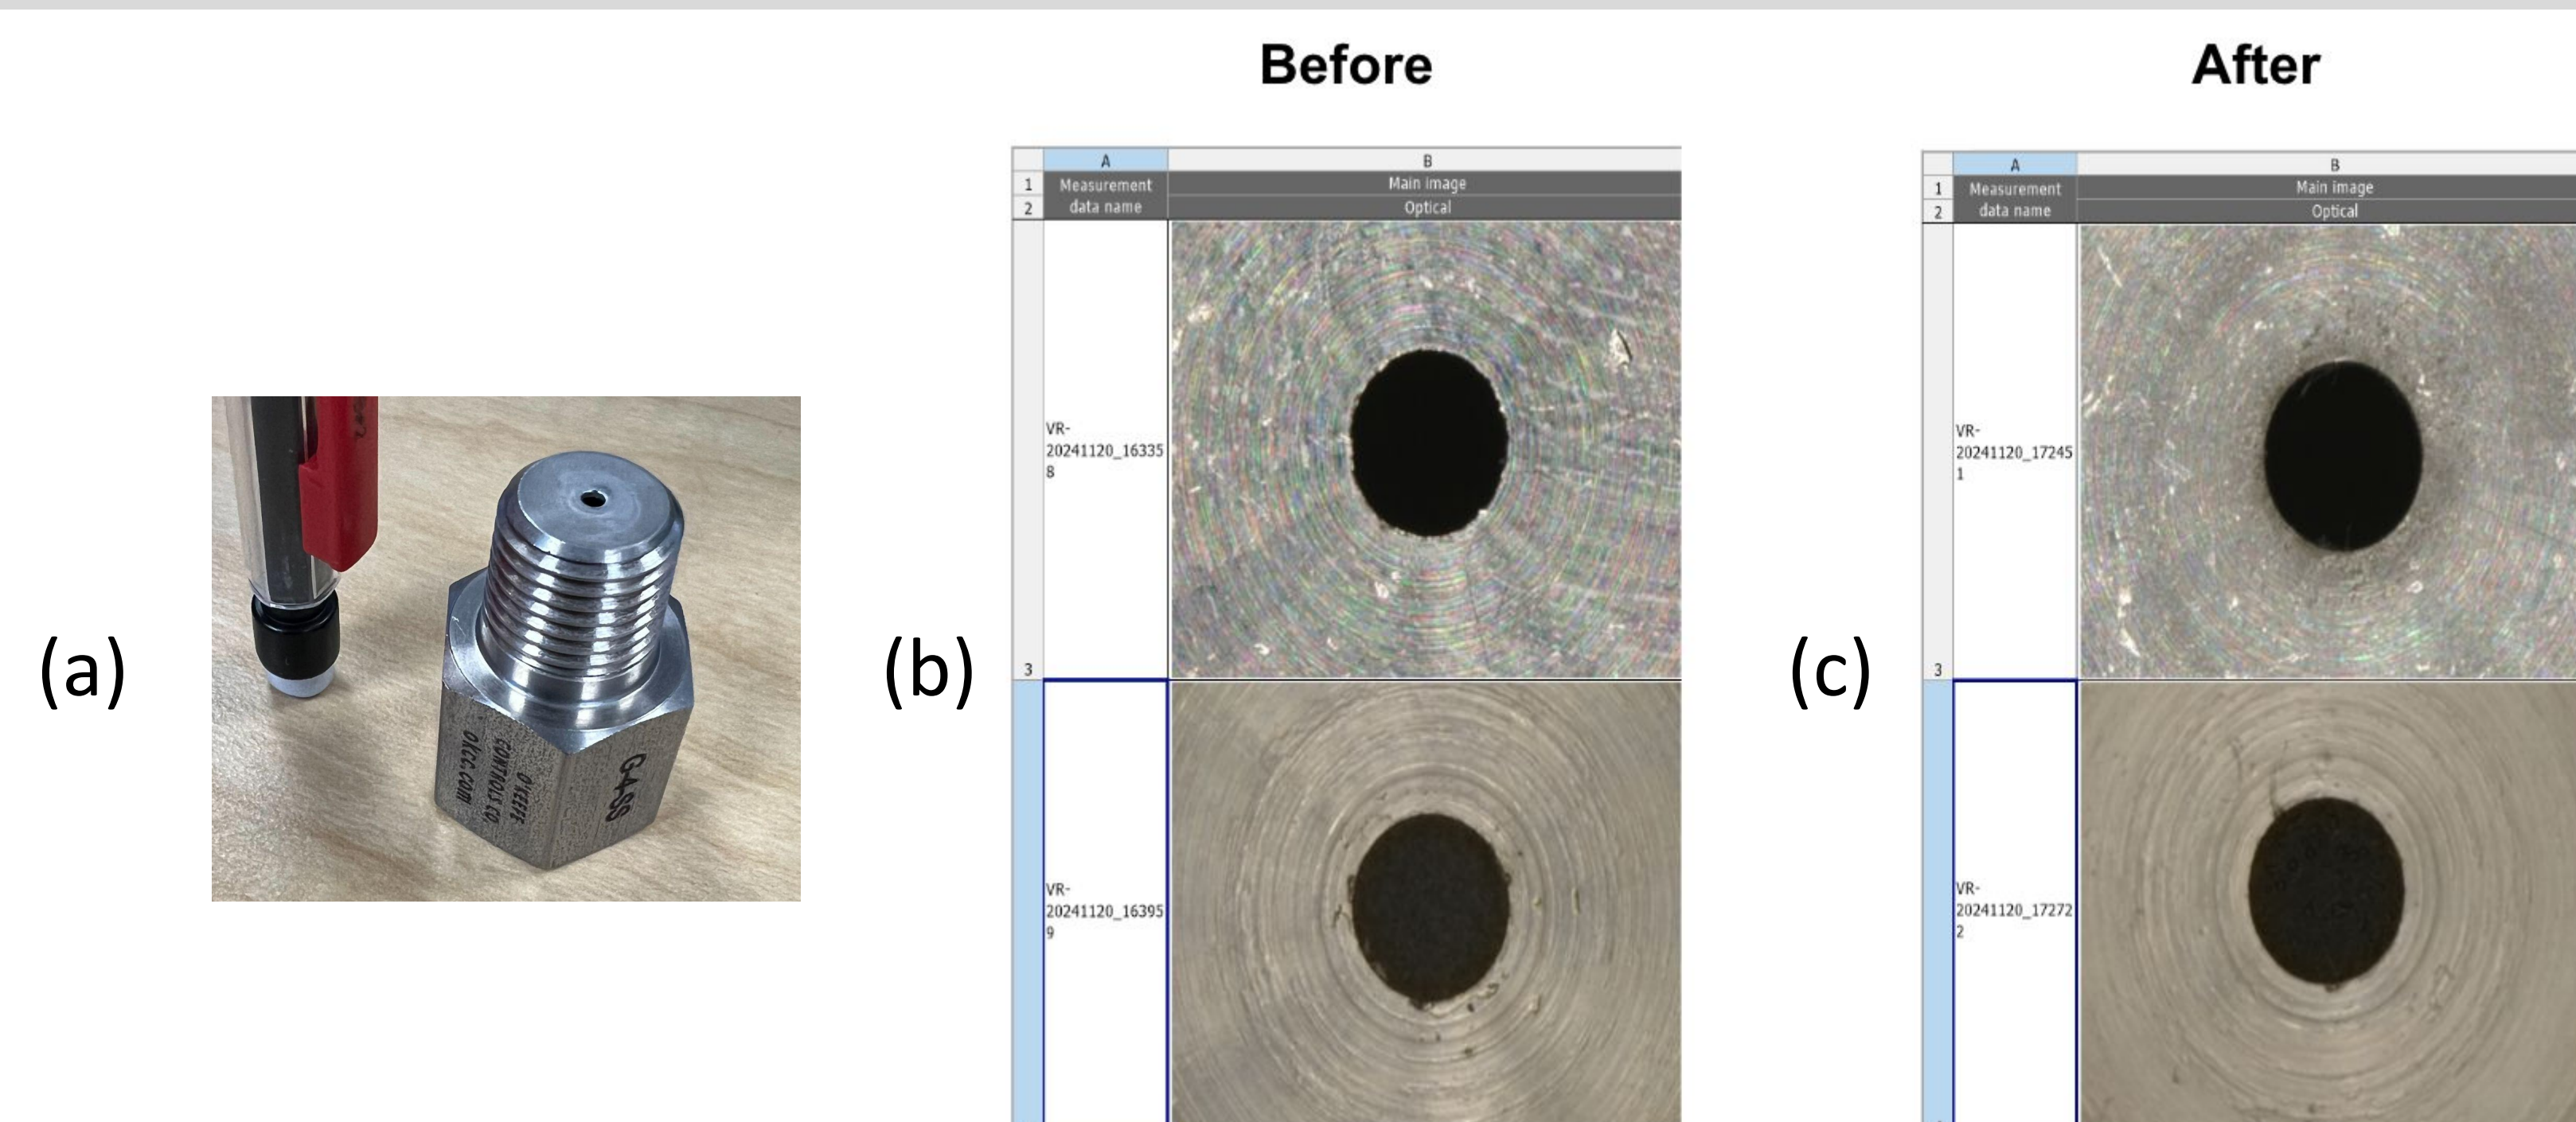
(a) Scaling of micro orifice compared to workpiece (b) Workpiece orifice under Keyence microscope before machining (c) Workpiece orifice under Keyence microscope after machining
